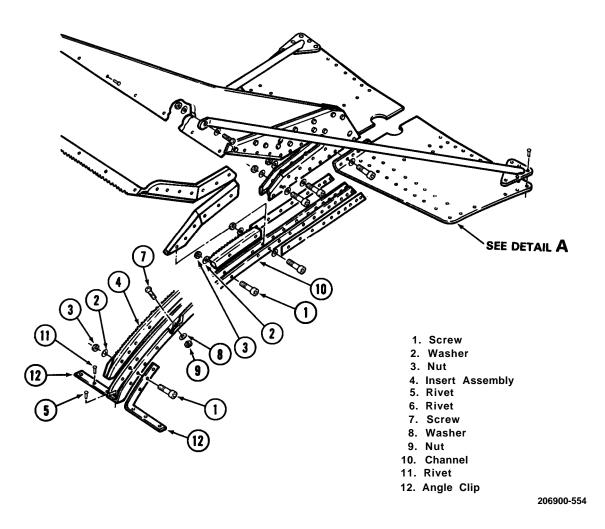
Removal – Sawtooth Insert/Channel Assembly Deflector Assembly A
